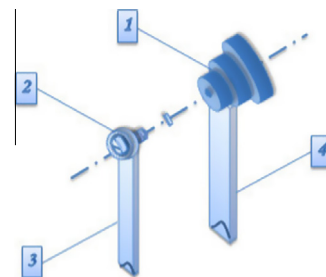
Stirling engine (connection part components) design. 1. Connection Ball Bearing and Rings, 2. Head Screw, 3. Connecting Rod, Short, 4. Connecting Rod, Long.
